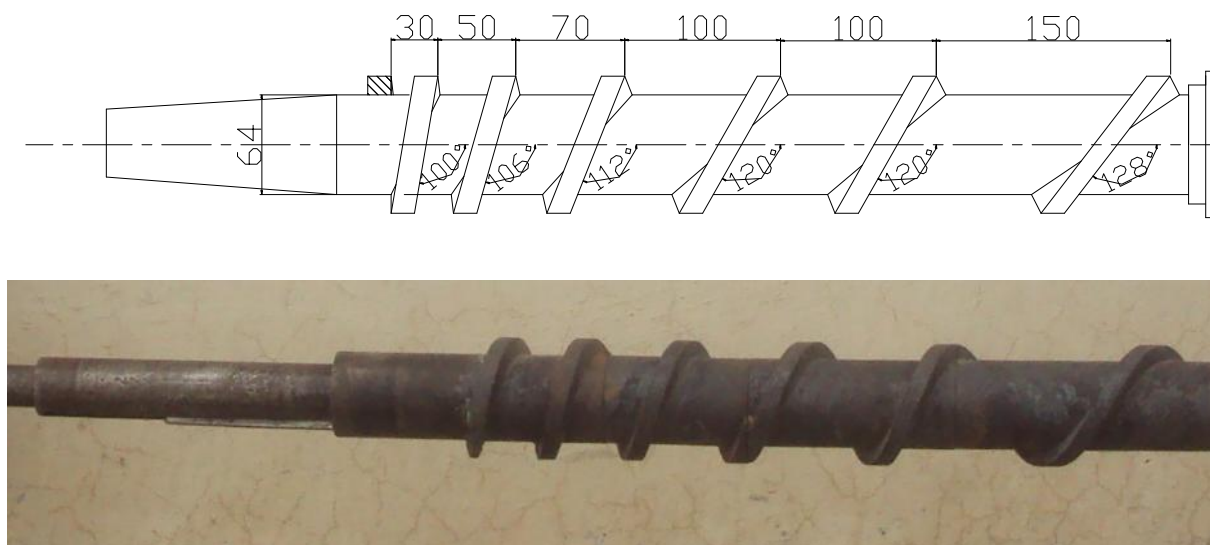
Screw-set with continue spiral setting (all dimension in mm)
